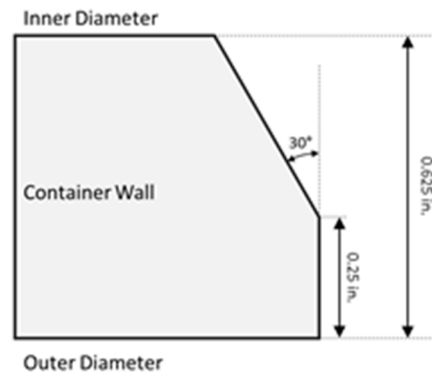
Edge preparation prior to welding used for both circumferential and longitudinal welds.
